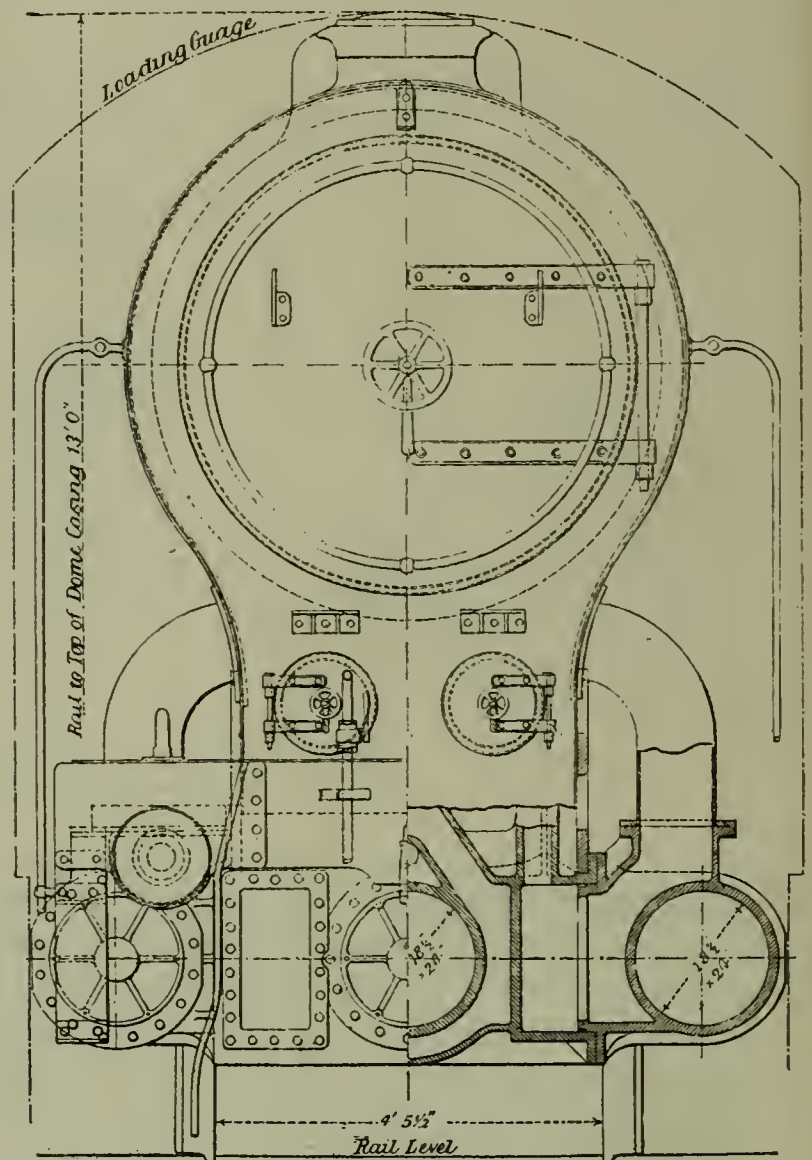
FRONT ELEVATION AND SECTION THROUGH CYLINDER—HEAVY ENGLISH LOCOMOTIVE.
